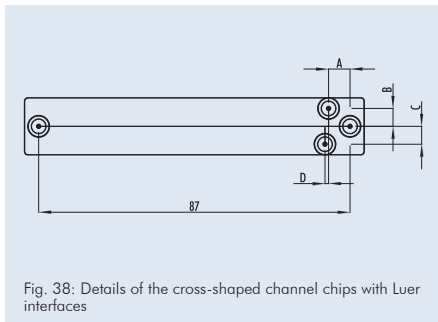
Details of the cross-shaped channel chips with Luer interfaces
